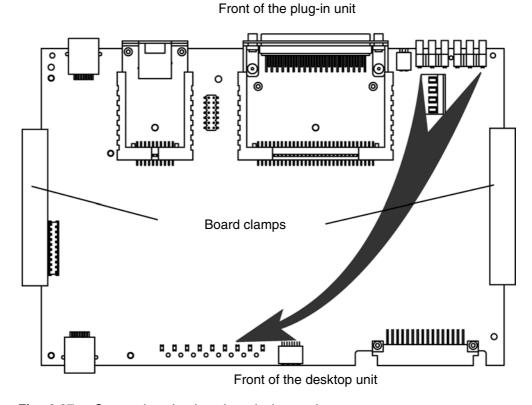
Conversion plug-in unit \rightarrow desktop unit
